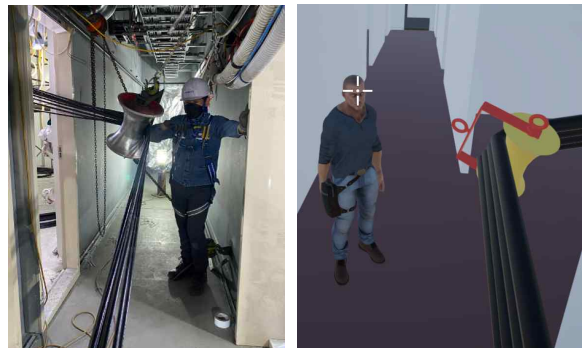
An example of the deck section where cables are installed in a straight line on the ship
